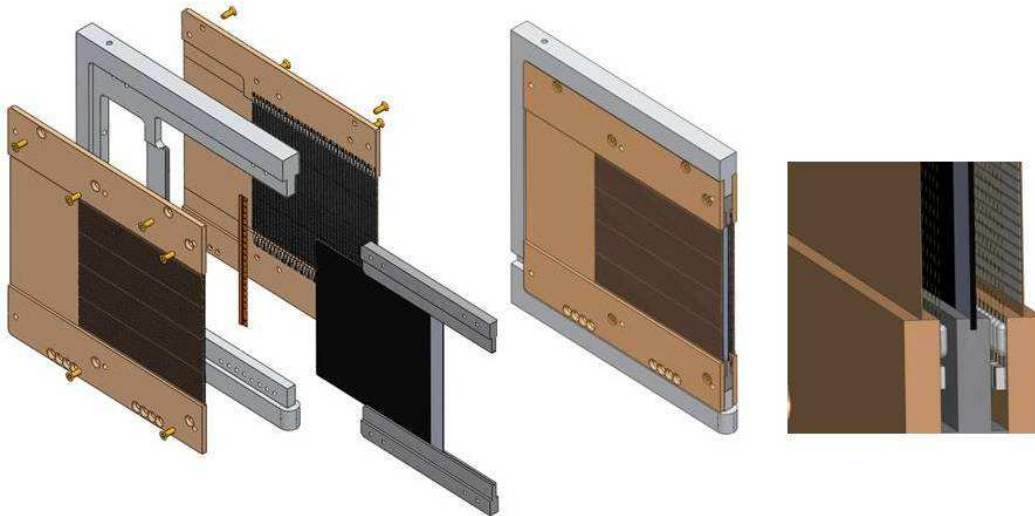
Exploded and assembled view of a cassette (left and center). Detail of a cassette (right): the two polyimide PCBs surrounding the coated blade.
